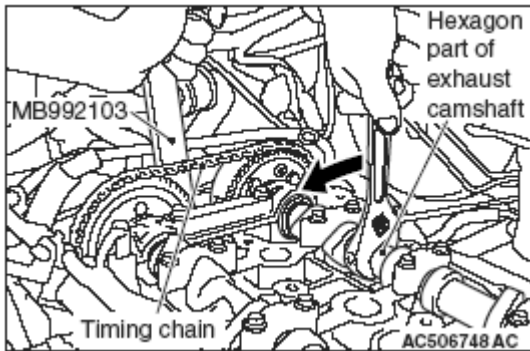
Hooking Special Tool Over Hexagon Part Of Camshaft
